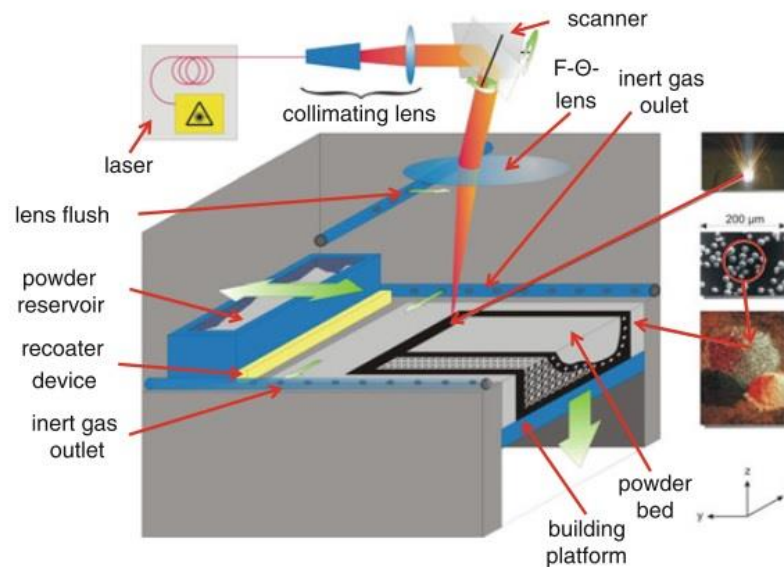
Schematic of powder bed laser additive manufacturing machine [7.1]
